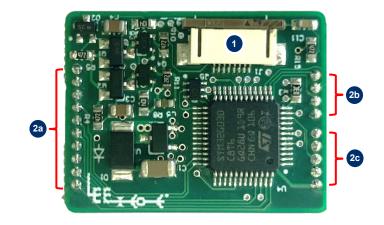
General Purpose Disc Pump Drive PCB interfaces
